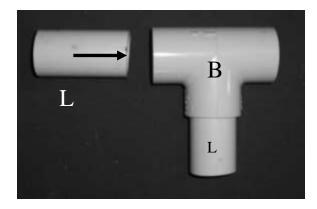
Assembly of the Medium/Large Wheelchair (Step 3).
